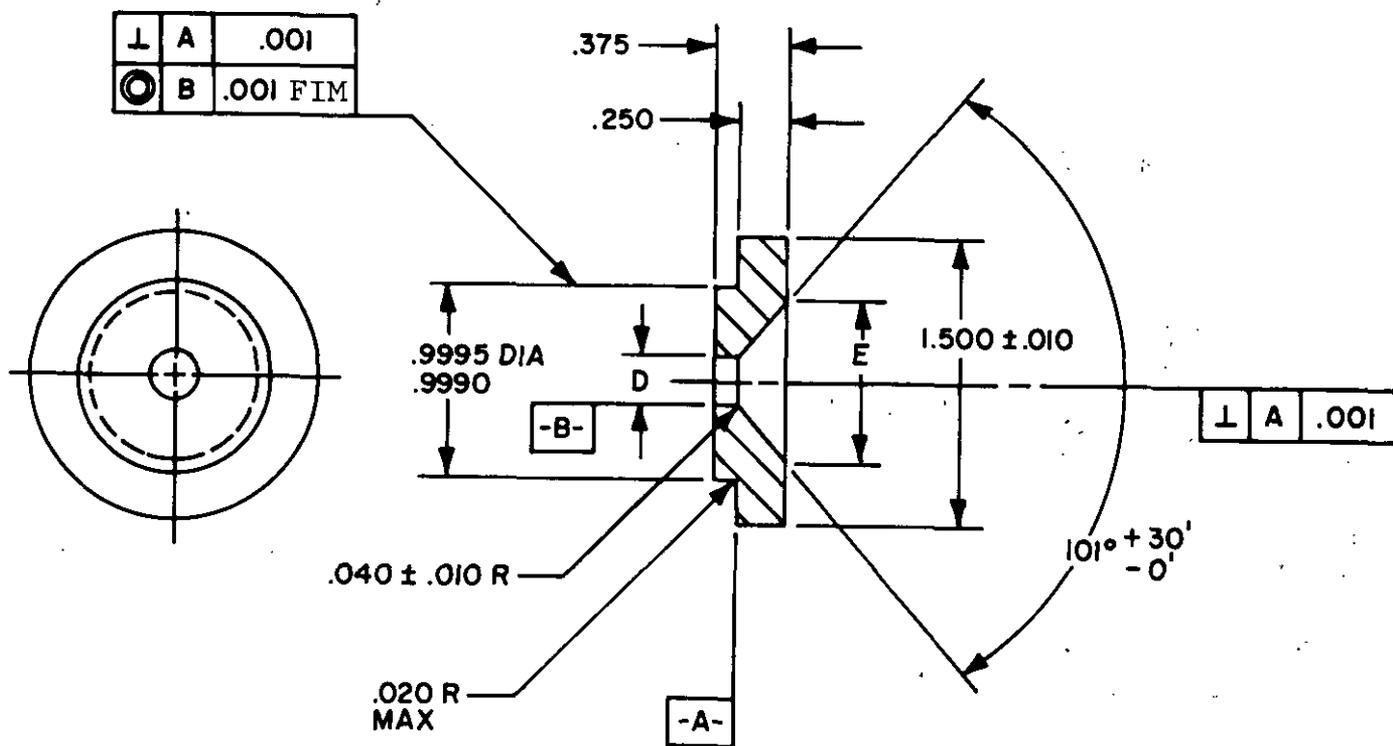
Holding fixture, fatigue 60,000 pounds capacity.
